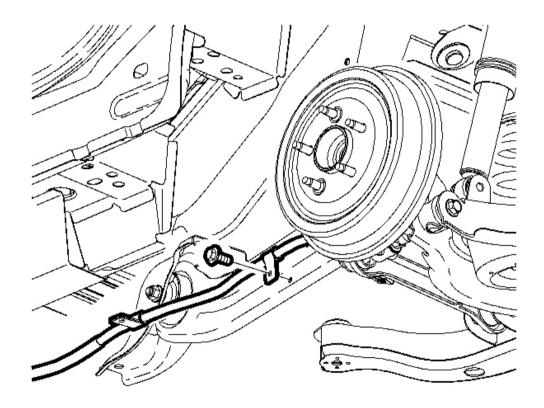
Park Brake Cable Clip & Trailing Arm Courtesy of GENERAL MOTORS CORP.
